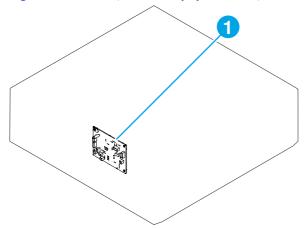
Major assemblies (550-sheet paper feeder; 2 of 2)
